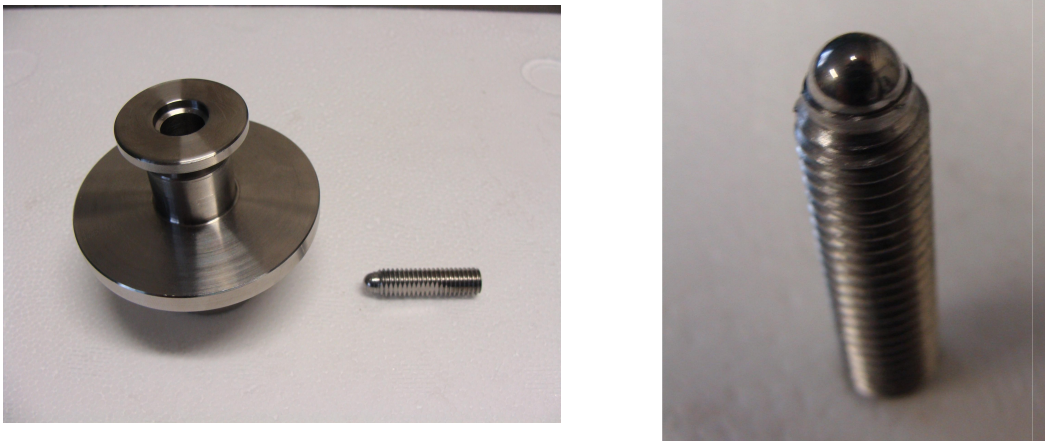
The screw with tempered stainless steel sphere (right) and the mock up of the mounting plate used for the test (left)
